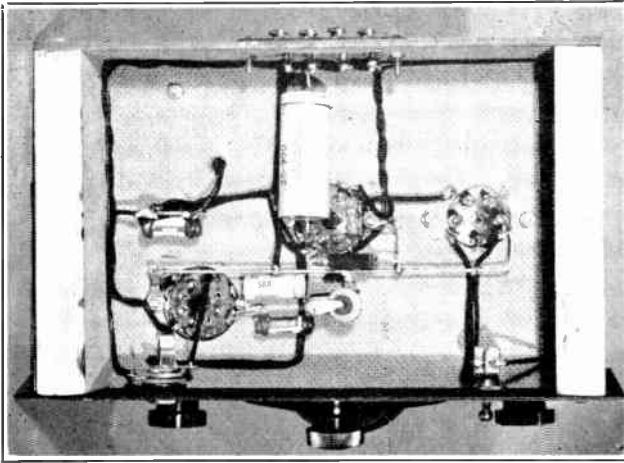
Under-chassis view of two-tube autodyne. The construction of the chassis and placement of components is clearly illustrated. If desired the phone jack may be mounted on the back of the chassis.
